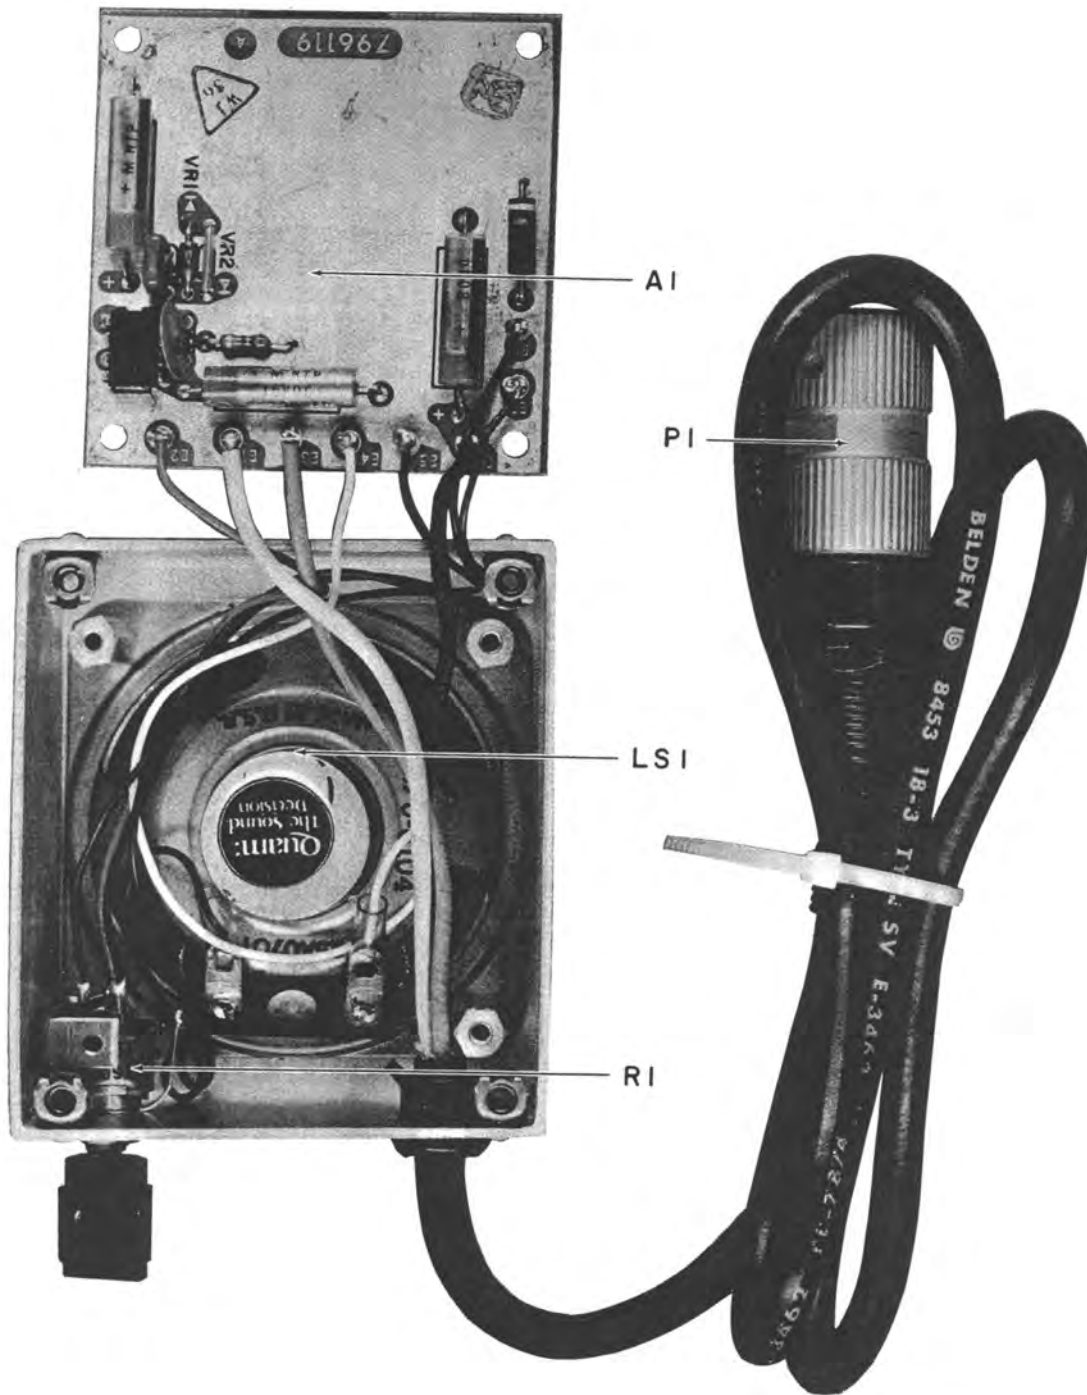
Type 796134-1 Speaker Amplifier Assembly (A11A1), Location of Components
